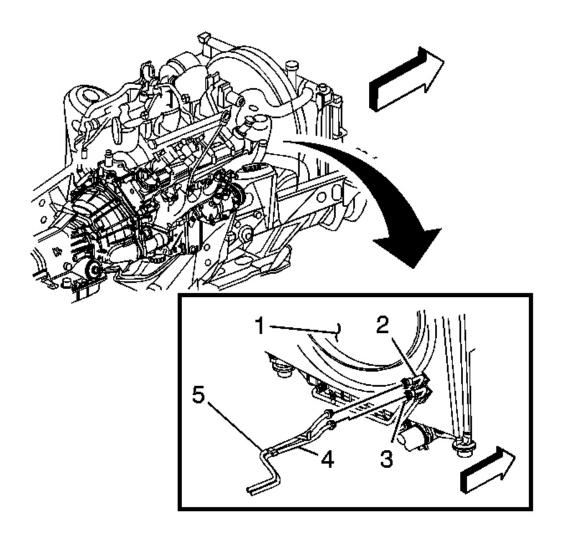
View Of Front Sections Of Cooler Lines Courtesy of GENERAL MOTORS CORP.
